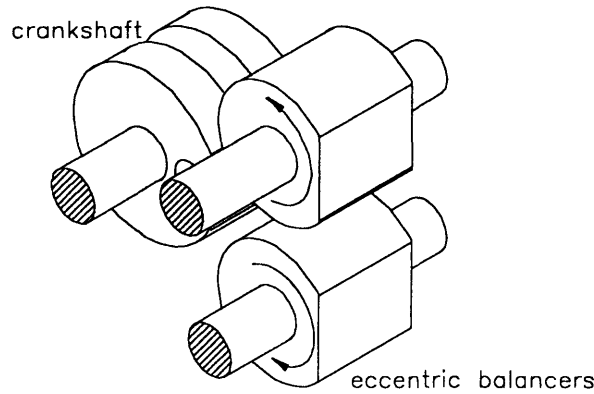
Sketch showing the arrangement of the counterbalance shafts and crankshaft.
